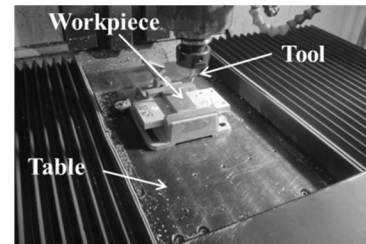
Experimental Setup for Single-axis Slotting Operation using the HFD and LMD
